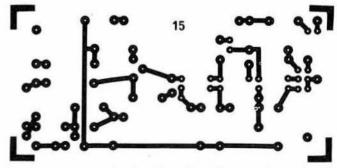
Etching pattern for the wiring side of the transmitter preamplifier board (PCB15). The pcb uses double-sided material, the other side being used as a groundplane
